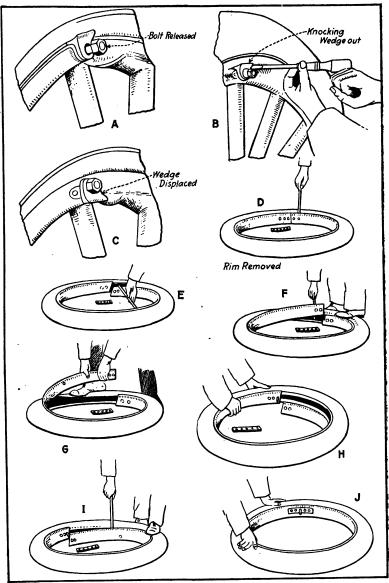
How to Remove a Demountable Rim From the Wheel and to Dismantle and Reassemble the Rim and Tire Casing.
